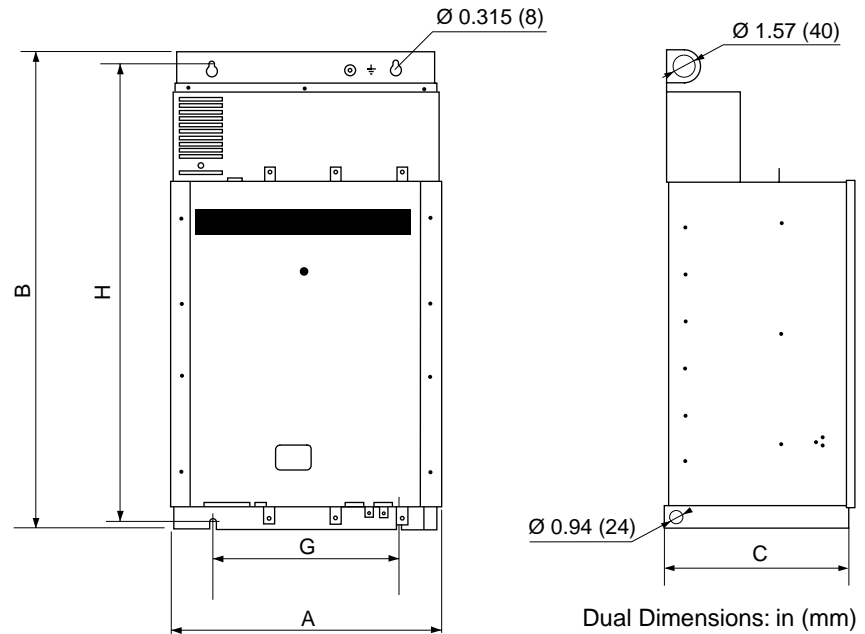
Dimension Drawing for 60 to 150 hp Controllers
